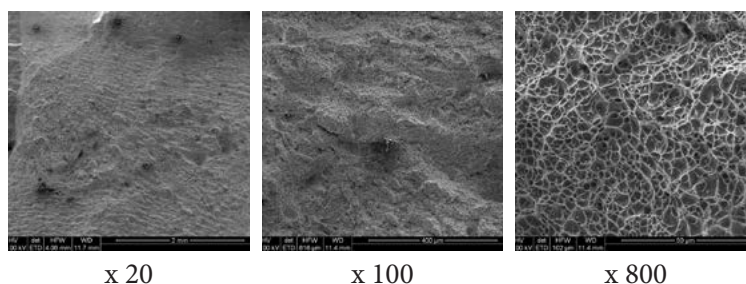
Area of brittle fracture “B” in impact test specimen GS-1
